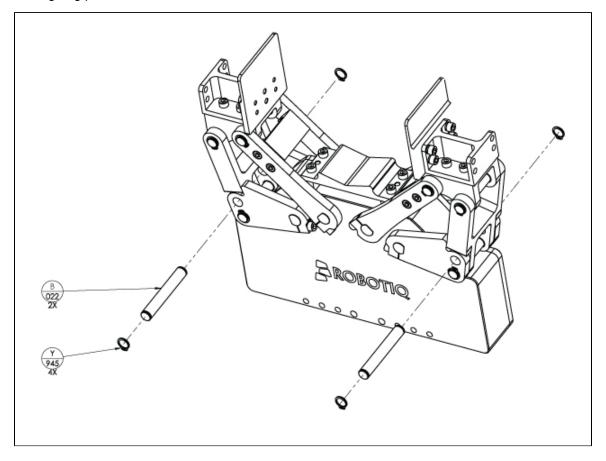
Assembly or removal of the parallel locking axles.
